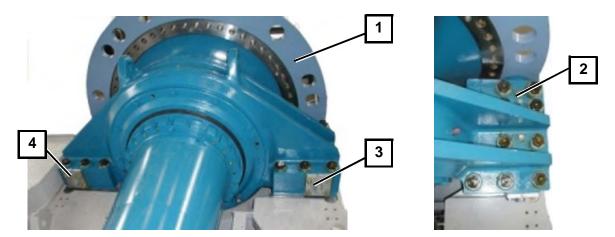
Rotor shaft with rotor lock disk (WTs of turbine class K07)
